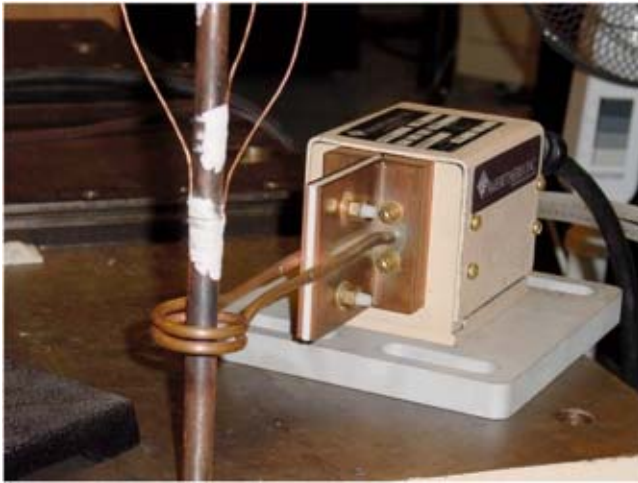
Setup of rod workpiece, water-cooled induction heating coil, and thermocouples
